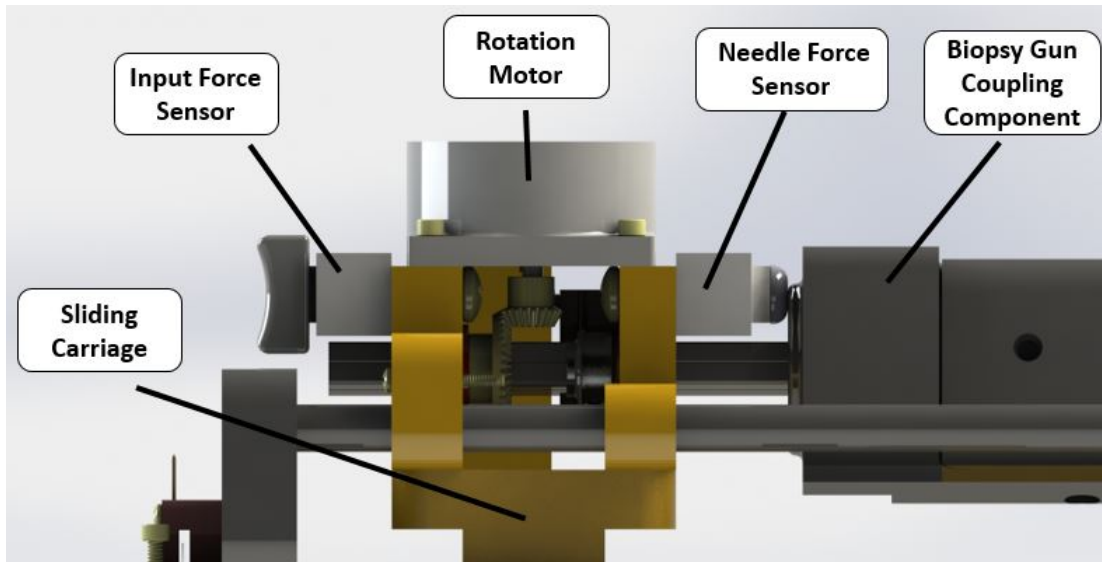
A close-up view of the needle driver sliding carriage showing the input and needle force sensors.
